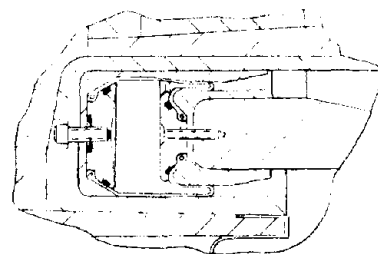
Conventional HIPPO TECHROLL Seal Movable Nozzle Assembly
